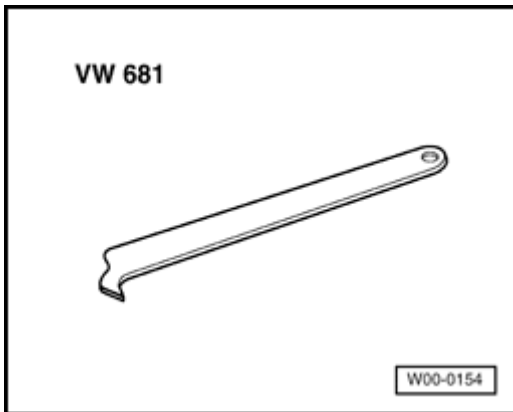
Special Tool - Oil Seal Extractor Lever VW 681
